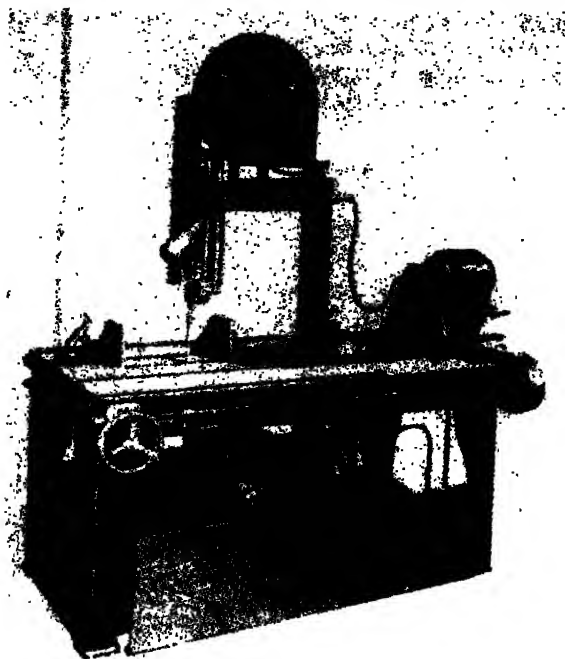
The Armstrong-Blum sawing machine. (*The Armstrong-Blum Manufacturing Company*)
